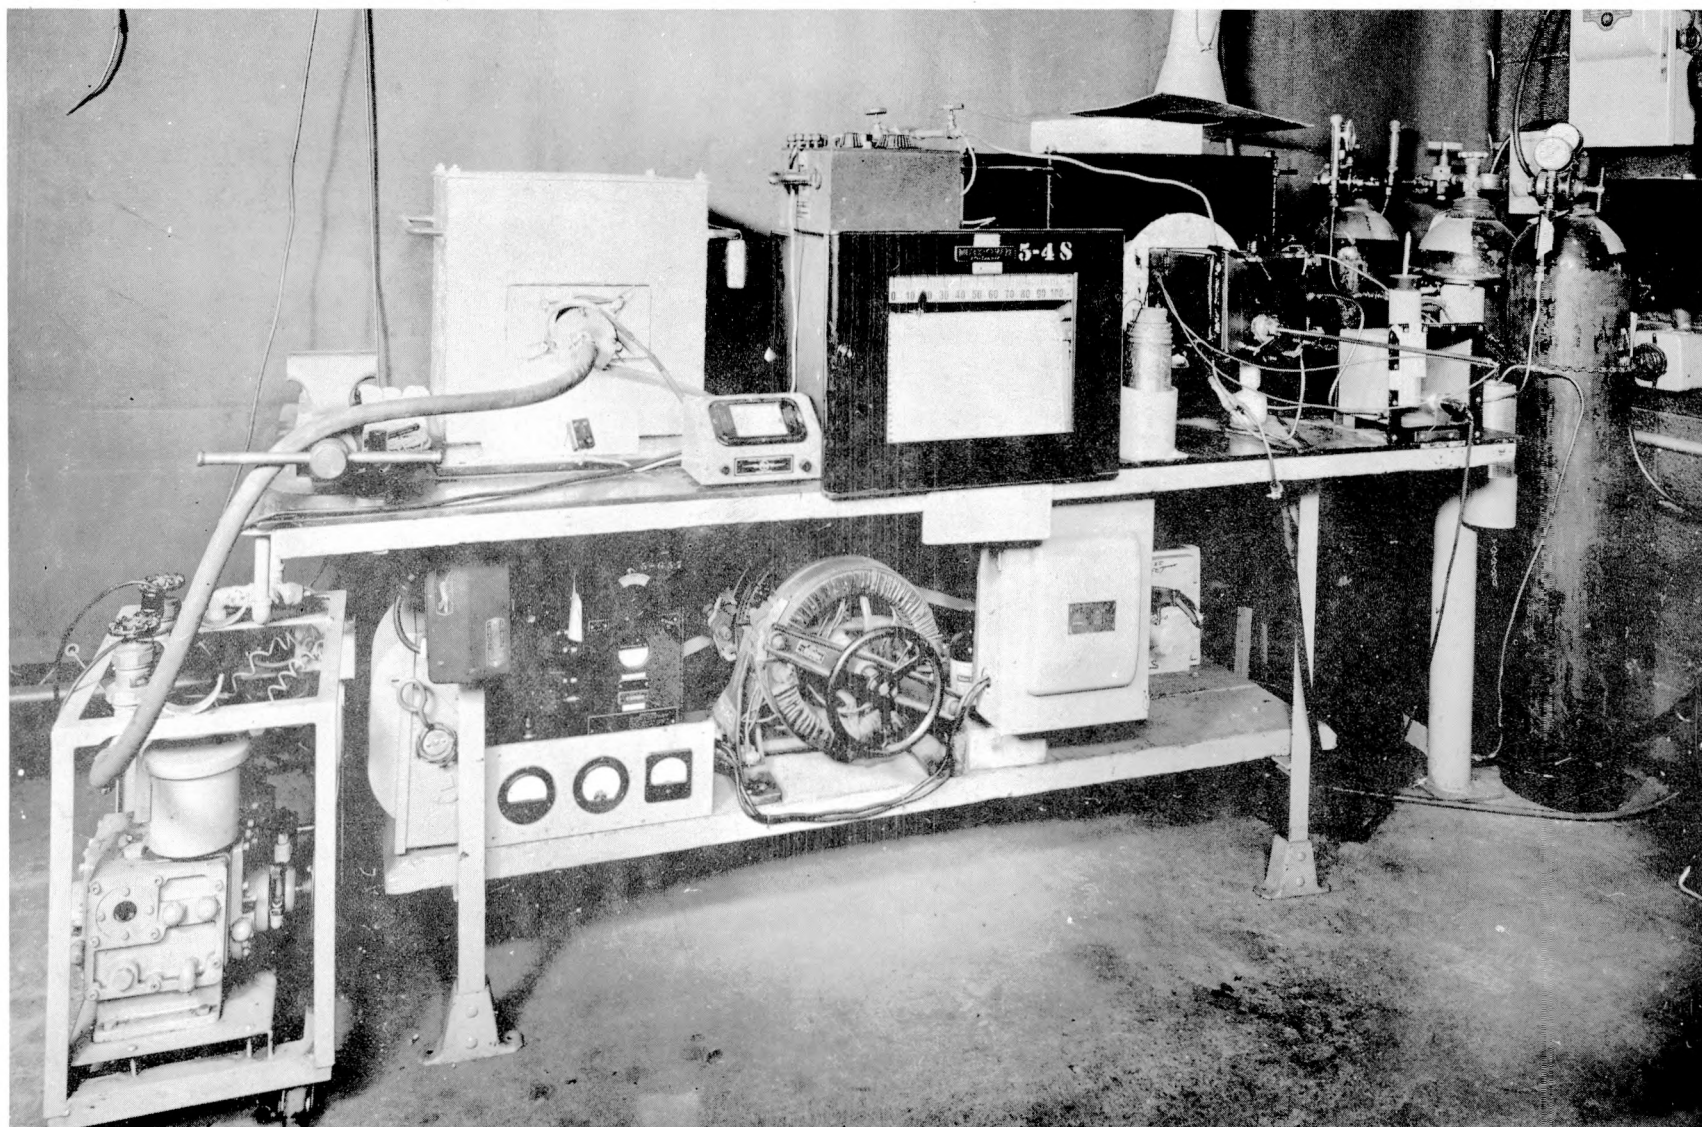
BRAZING FURNACES AND EQUIPMENT
